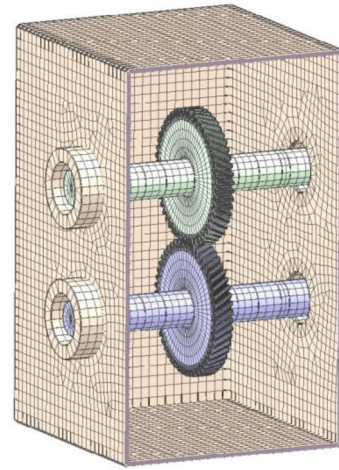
Finite element model of the gearbox with the full FE mesh for the housing (Cut view).
